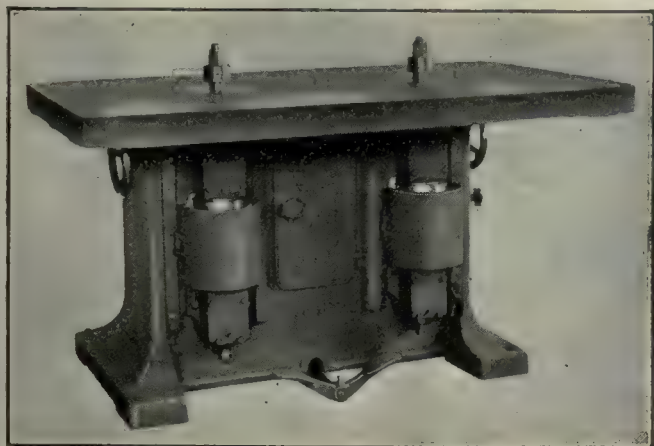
OLIVER NO. 483 HIGH-SPEED, DOUBLE, WOOD-SHAPING MACHINE
